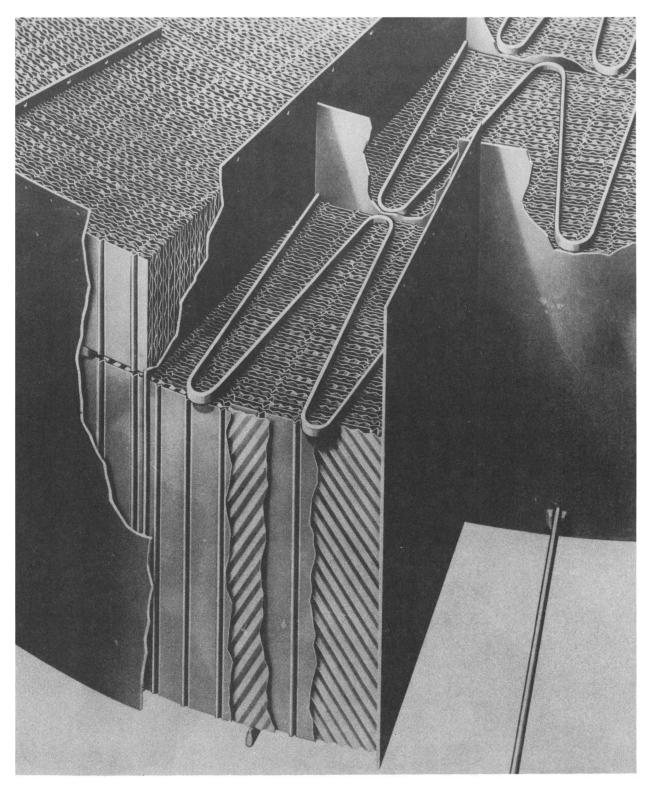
Detail of One Type of Installation of Heater Elements—Shorter Top or Cold-End Elements and Longer Bottom or Hot-End Elements.
